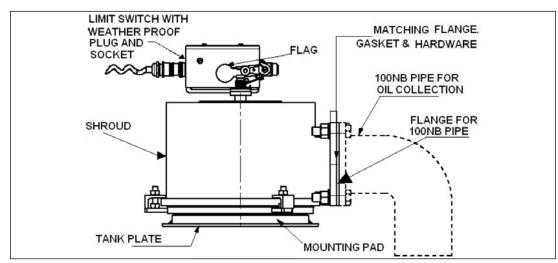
PRV with shroud with weather proof plug and socket arrangement for connecting cable
